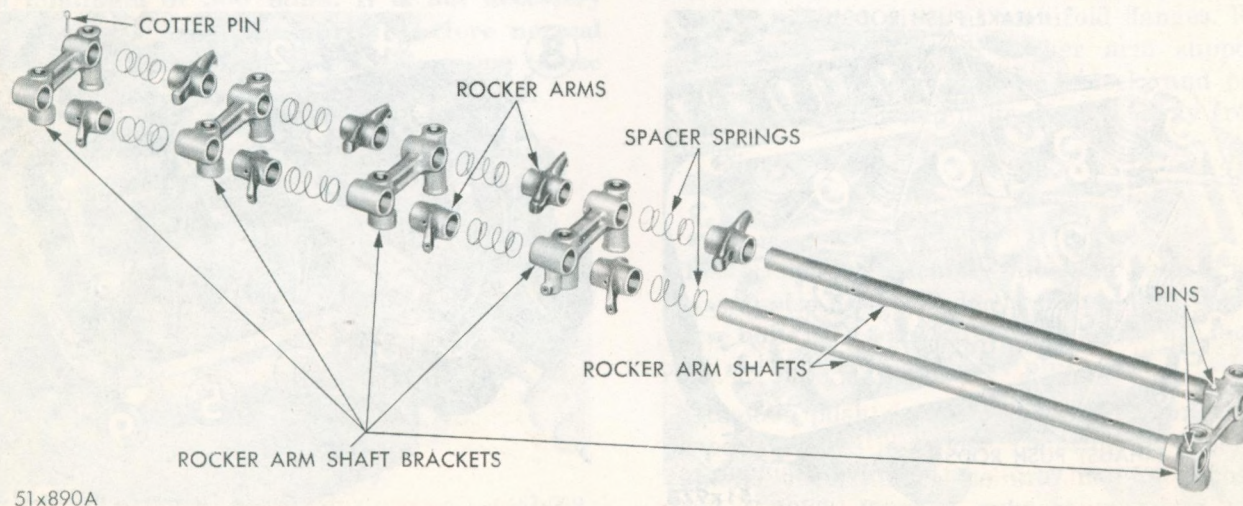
Rocker Shaft Assembly (Disassembled View) (FirePower)
